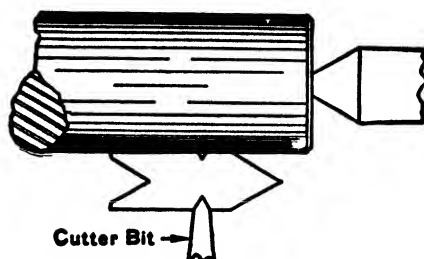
For cutting screw threads, set the cutter bit square with the work. Use a center gage if one is available. (South Bend Lathe Works)
